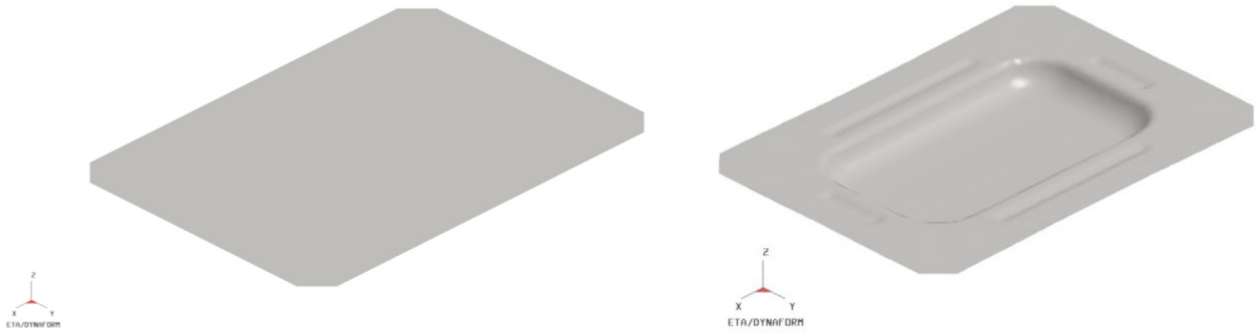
Blank and part obtained by deep drawing with draw beads.
